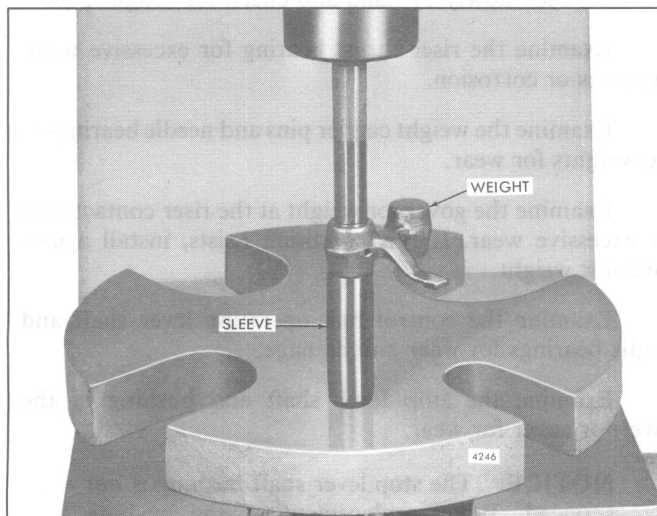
Removing Governor Weight Bearings using Tool J 8985
